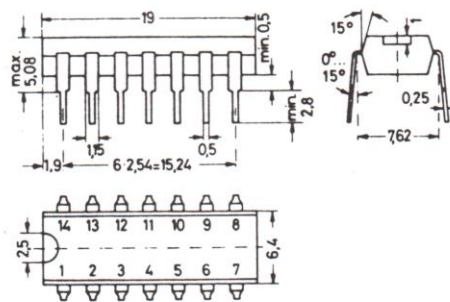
SAJ 300 R in dual in-line (Dil) plastic TO-116 package 20 A 14 according to DIN 41 866 Weight approximately 1.1 g Dimensions in mm
